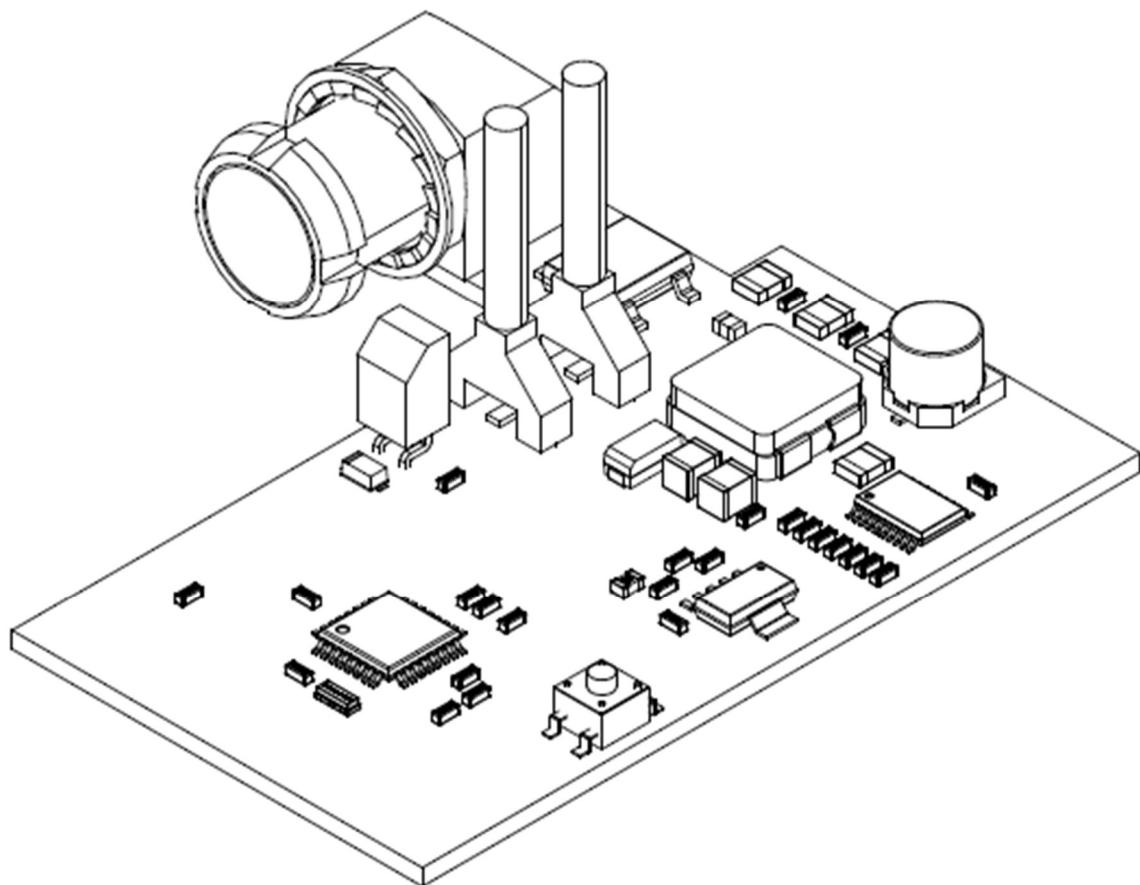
MACK Sony Camera Control System Receiver PCB Isometric View
